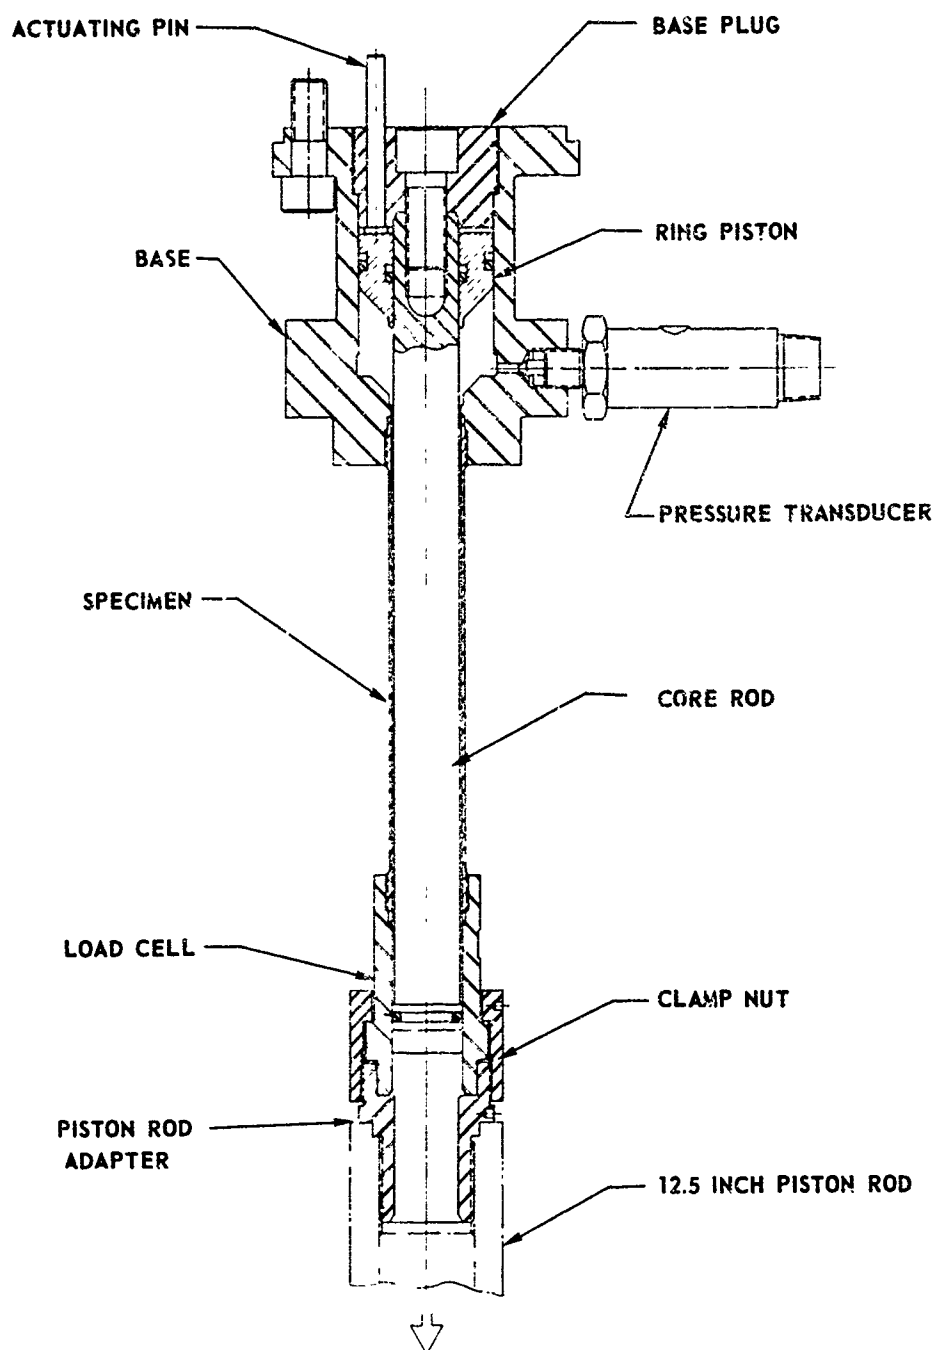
Sectional View of Specimen Package for Axial Tension and Circumferential Tension
